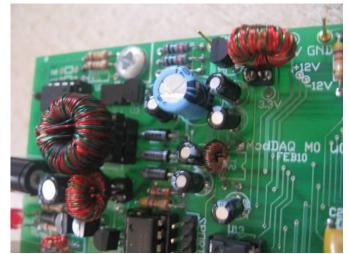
Examples of toroid magnetic parts mounted to DIP headers for insertion into DIP sockets on the board.
